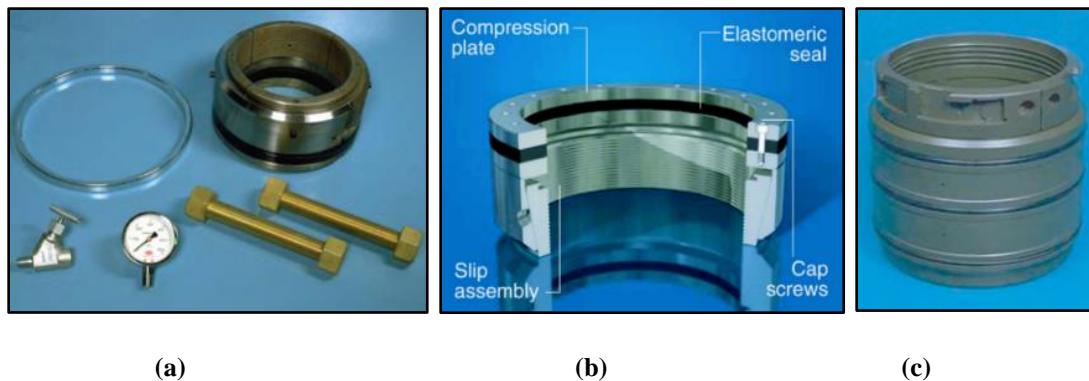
Different types of elastomer hanger seal assemblies: (a) weight-set slip-and-seal assembly with casing head installation components, (b) mechanical-set slip-and-seal assembly in sub-mudline liner hanger assembly, and (c) mandrel type hanger seal assembly (Speer 2006)
